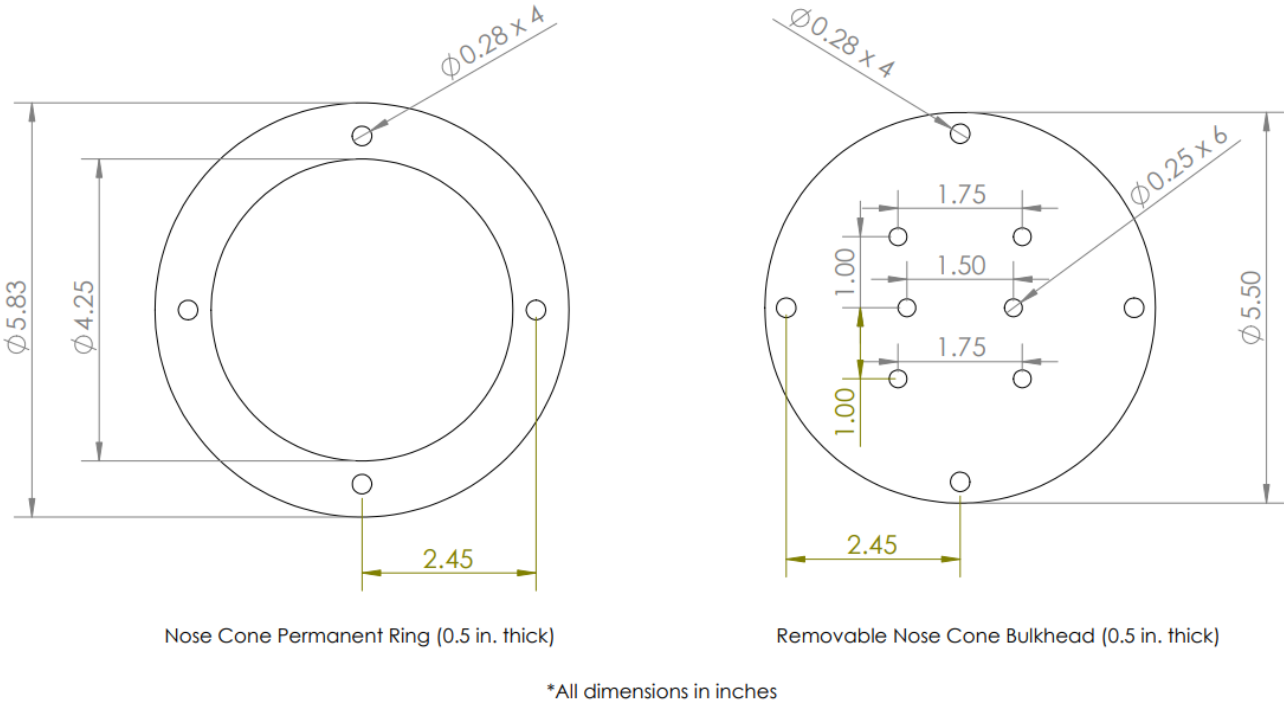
Dimensions of the nose cone centering ring and removable bulkhead.
